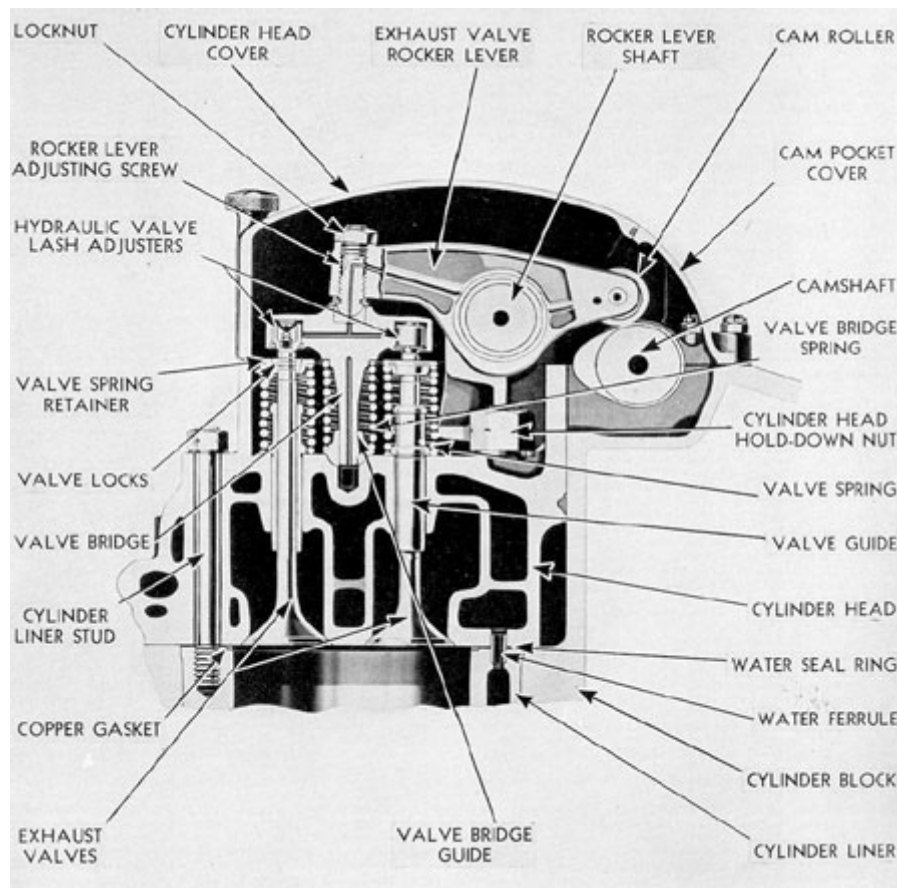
Cross section of cylinder head through exhaust valves, GM.
